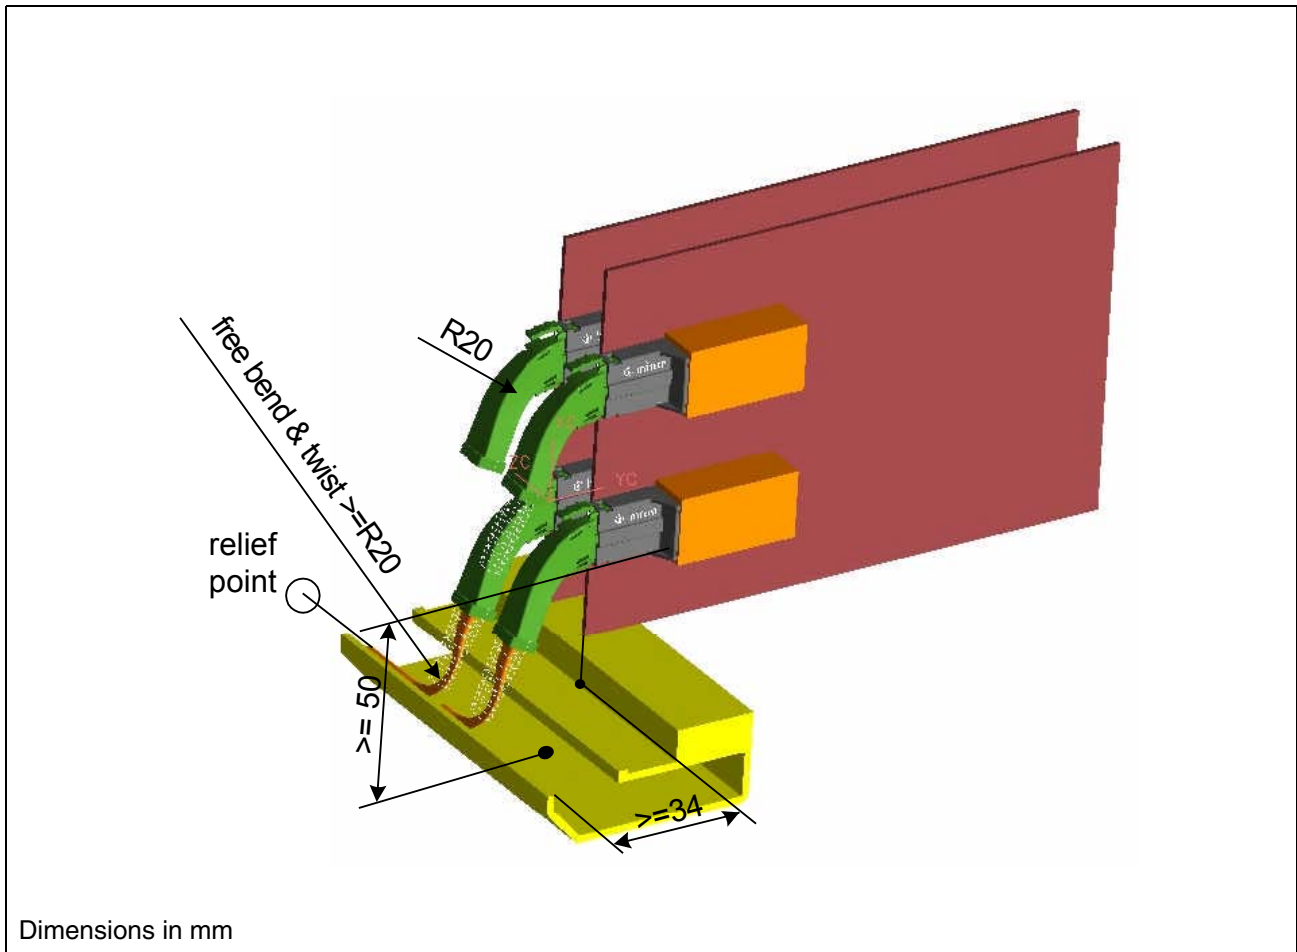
Example of Board with PAROLI® Modules and 4 SMC SB Connectors
